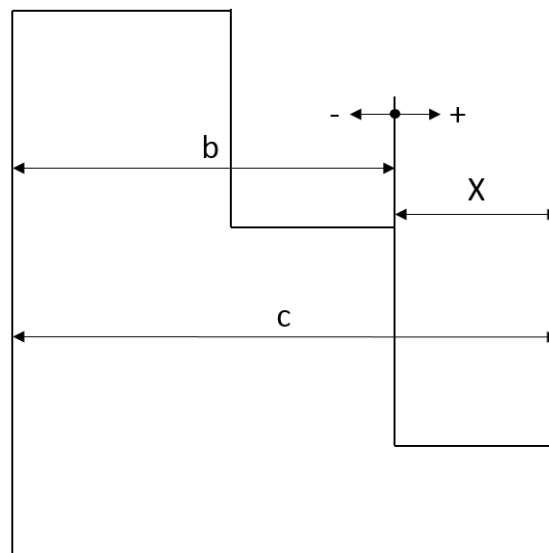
Example of evaluating a parts tolerance stack-up conditions using tolerance charts. X is the assembly resultant.
